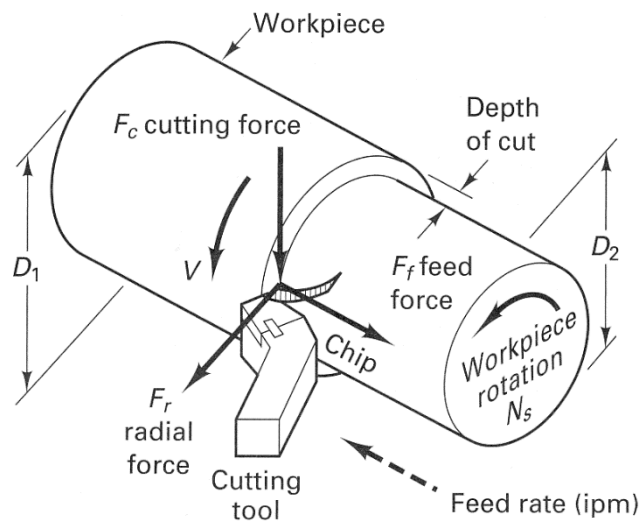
Turning a cylindrical workpiece on a lathe requires you select the cutting speed, feed, and depth of cut.
